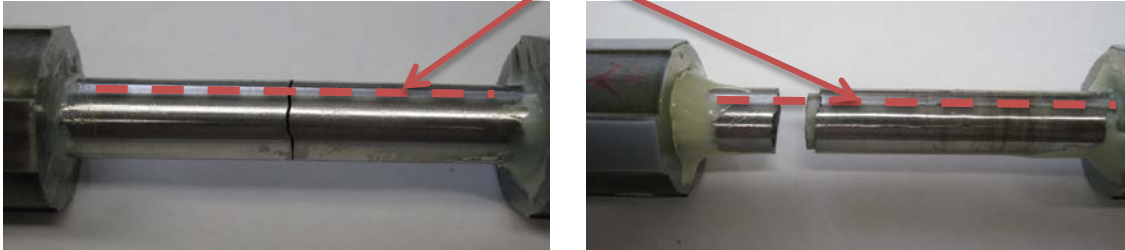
Both tests are failed at gage section, done on a MTS machine. SSAP02 (w/o epoxy bond) failed earlier than tested sample of SS tube only.
